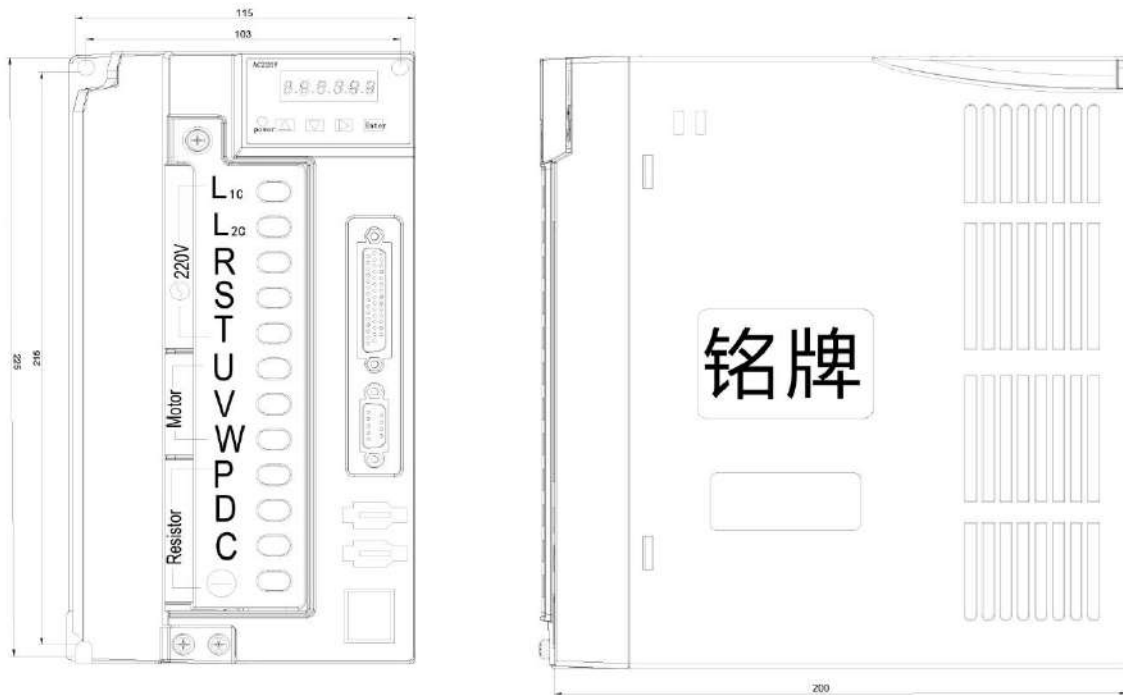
DZ-50B2-J, DZ-75B2-J series side installation dimension
